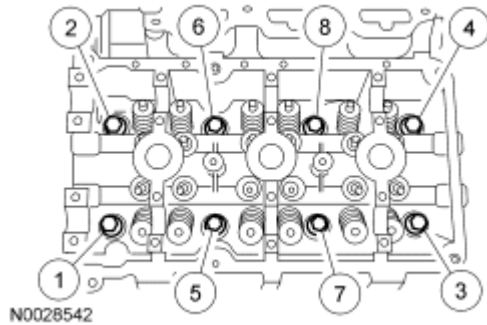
Identifying Loosening Sequence Of Cylinder Heads Bolts
